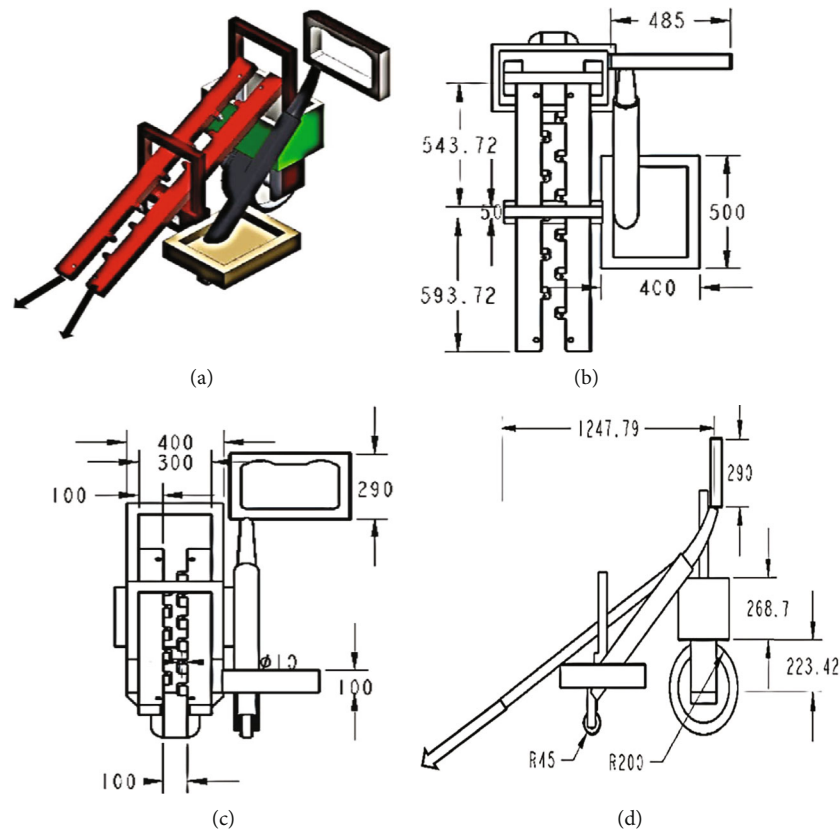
CAD diagram of carrot harvesting machine: (a) overall 3D model, (b) top view, (c) front view, and (d) side view of the harvesting machine.
